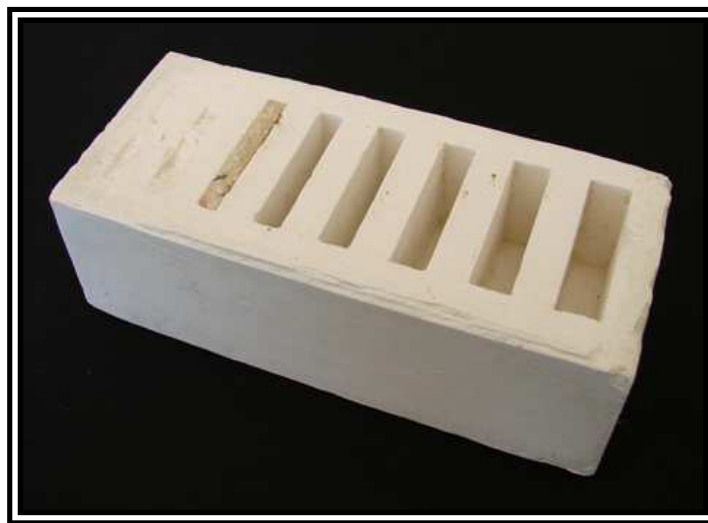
Test geometry 5 – re-test – plaster of Paris mould
